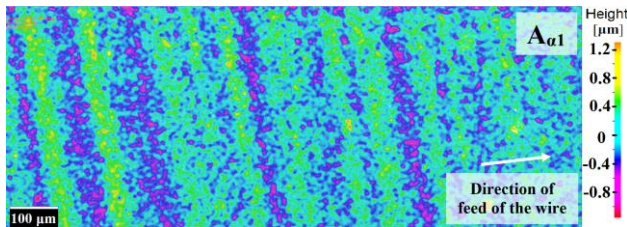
The Surface of The Primary Clearance Angle Sharpened by WEDM Technology
